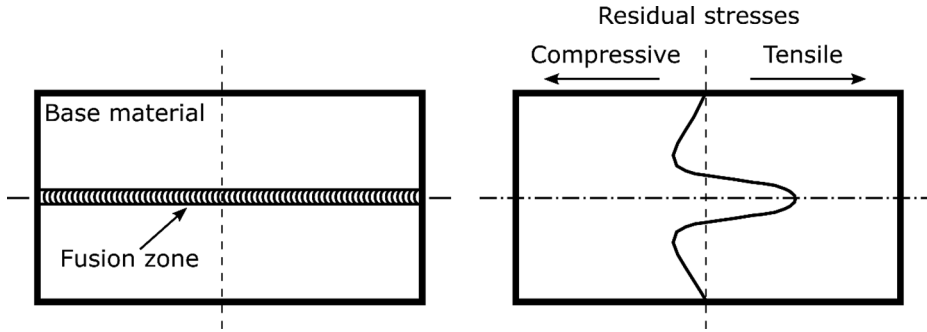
Schematic of a butt welded joint showing a residual stress pattern.
